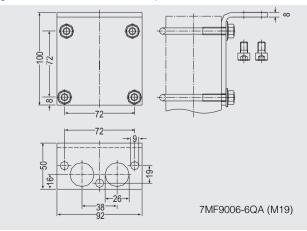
/102 Mount. bracket for three-spindle valve manifolds, dimensions
